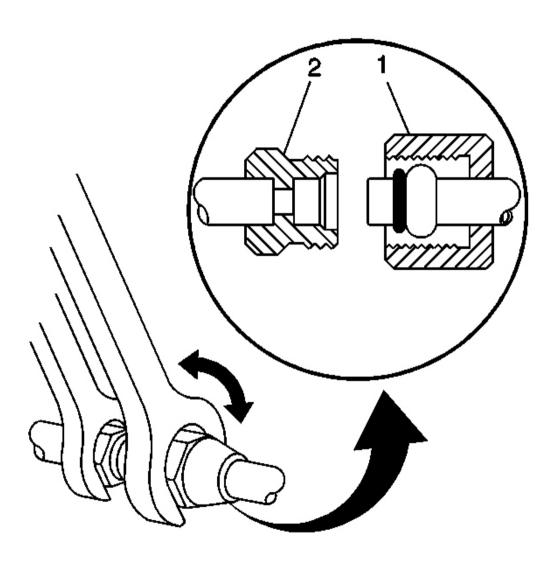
Identifying A/C Line Fittings Courtesy of GENERAL MOTORS CORP.
